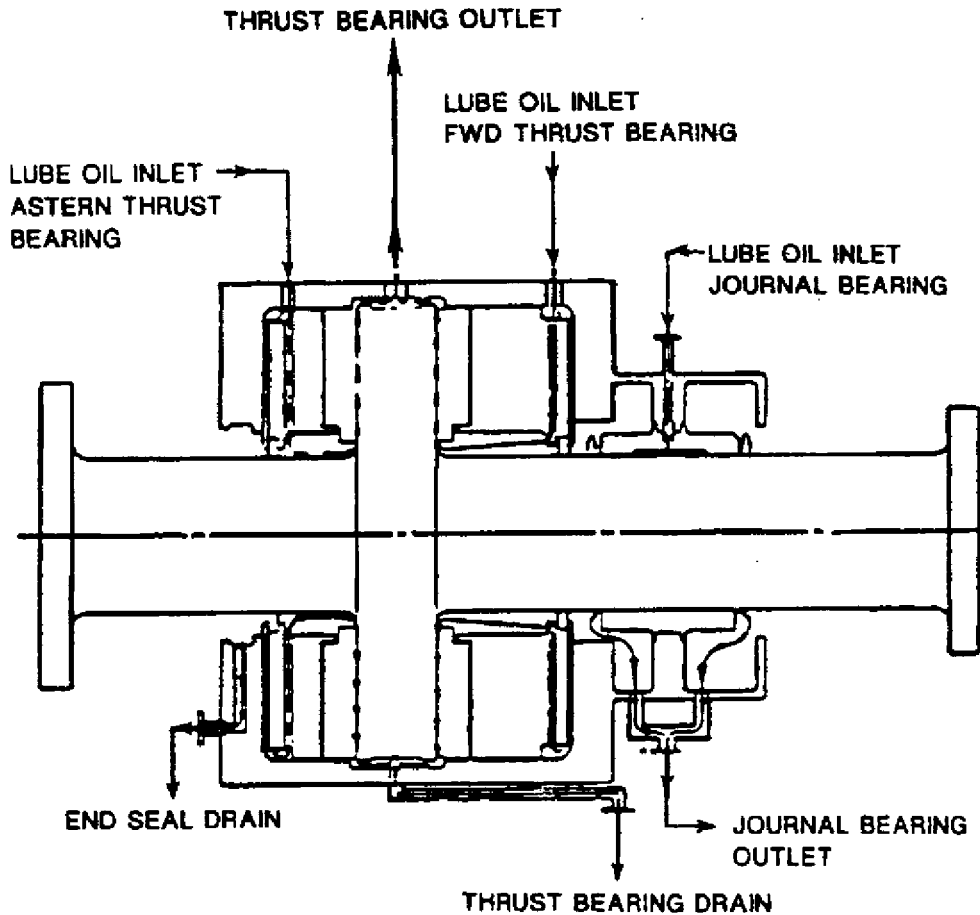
Typical Submarine Thrust Bearing Lubrication Diagram
